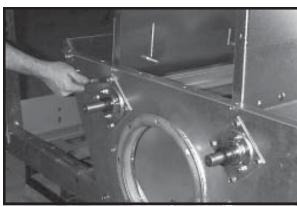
Tightening top bolt on 1" meter roll bearing assembly.
